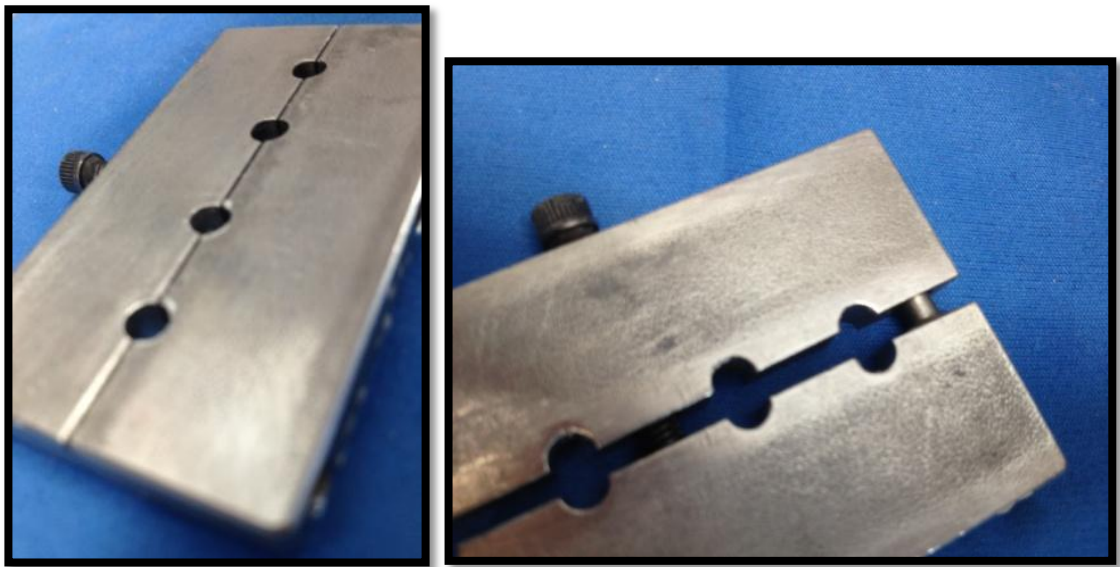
The Split stainless steel mould used to fabricate compressive, diametral compressive and compressive fatigue specimens.
